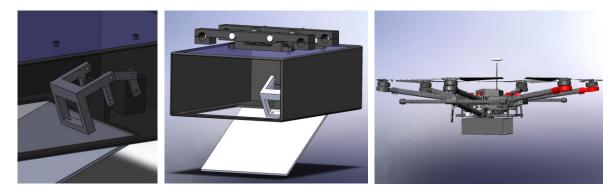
(a) Single-door opening mechanism actuated by a servo motor, (b) Resultant SolidWorks assembly with mount for Matrice 600 (sponsor's drone), (c) Assembly mounted on Matrice 600
